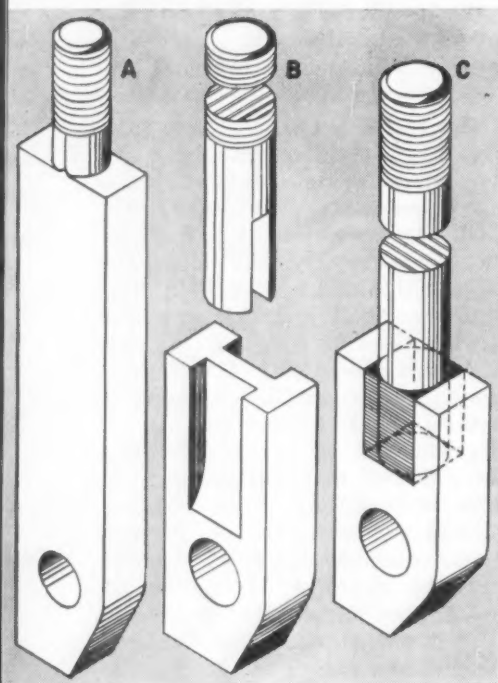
(A) Long single-piece swinging bolt with rectangular head; (B) swinging bolt in which rod is slotted to engage lower piece; and (C) swinging bolt in which the head is slotted and the cylindrical shaped screw end is slipped into the head and welded.
